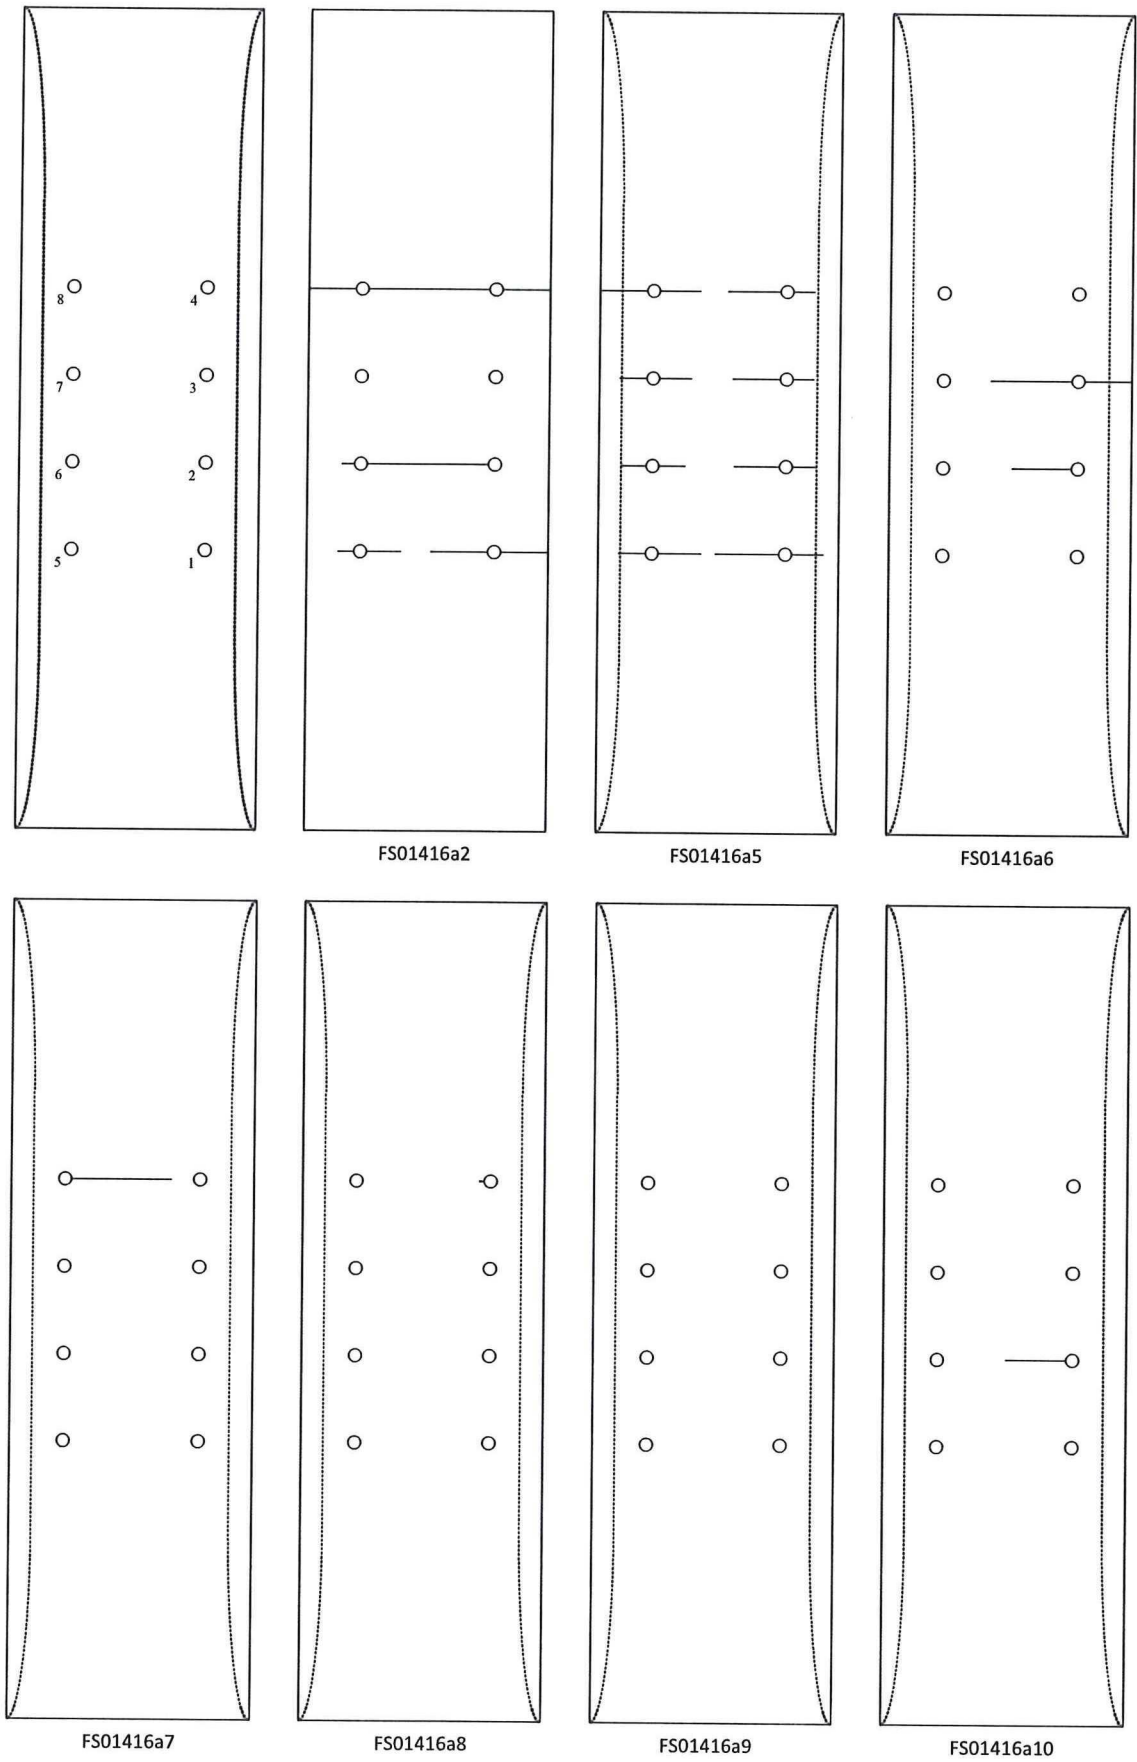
Fatigue crack configuration in coupons at the metal flange side
